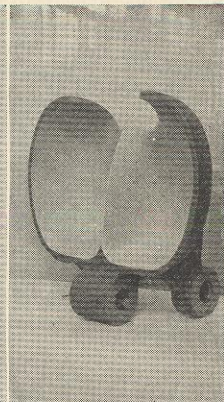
FRONT VIEW OF A CHAIN-TYPE BUCKET
